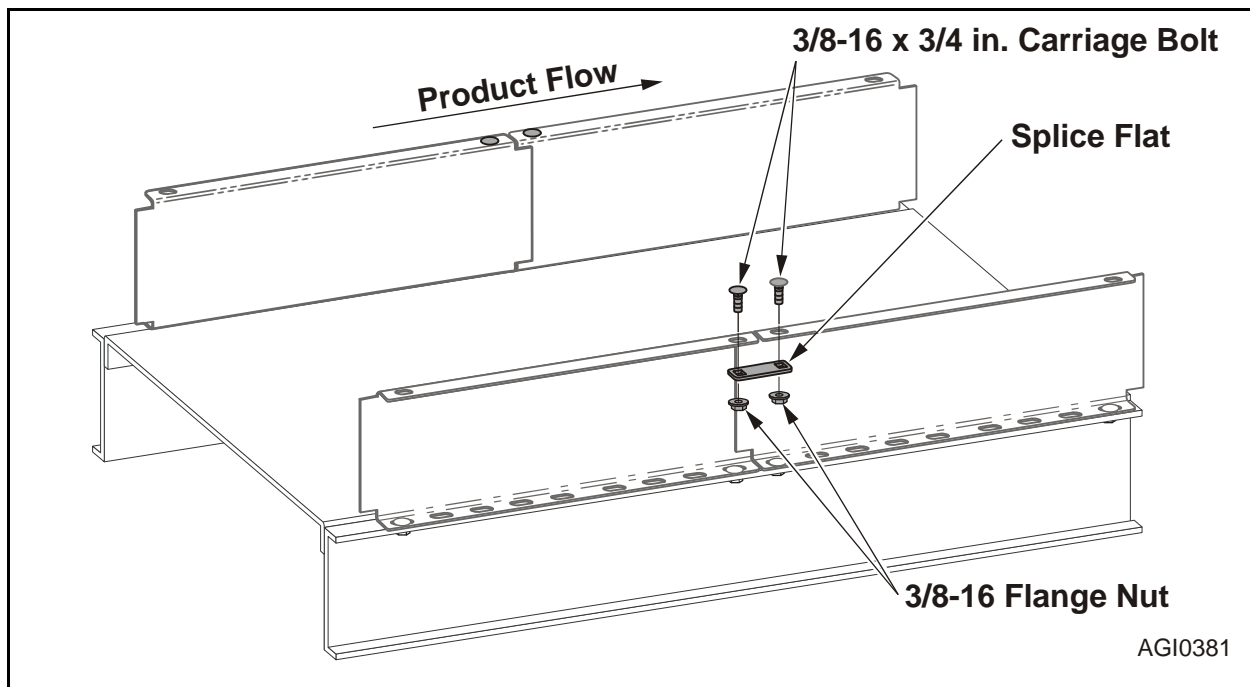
80 Connecting Direct-Mounted Standard Side Guides
